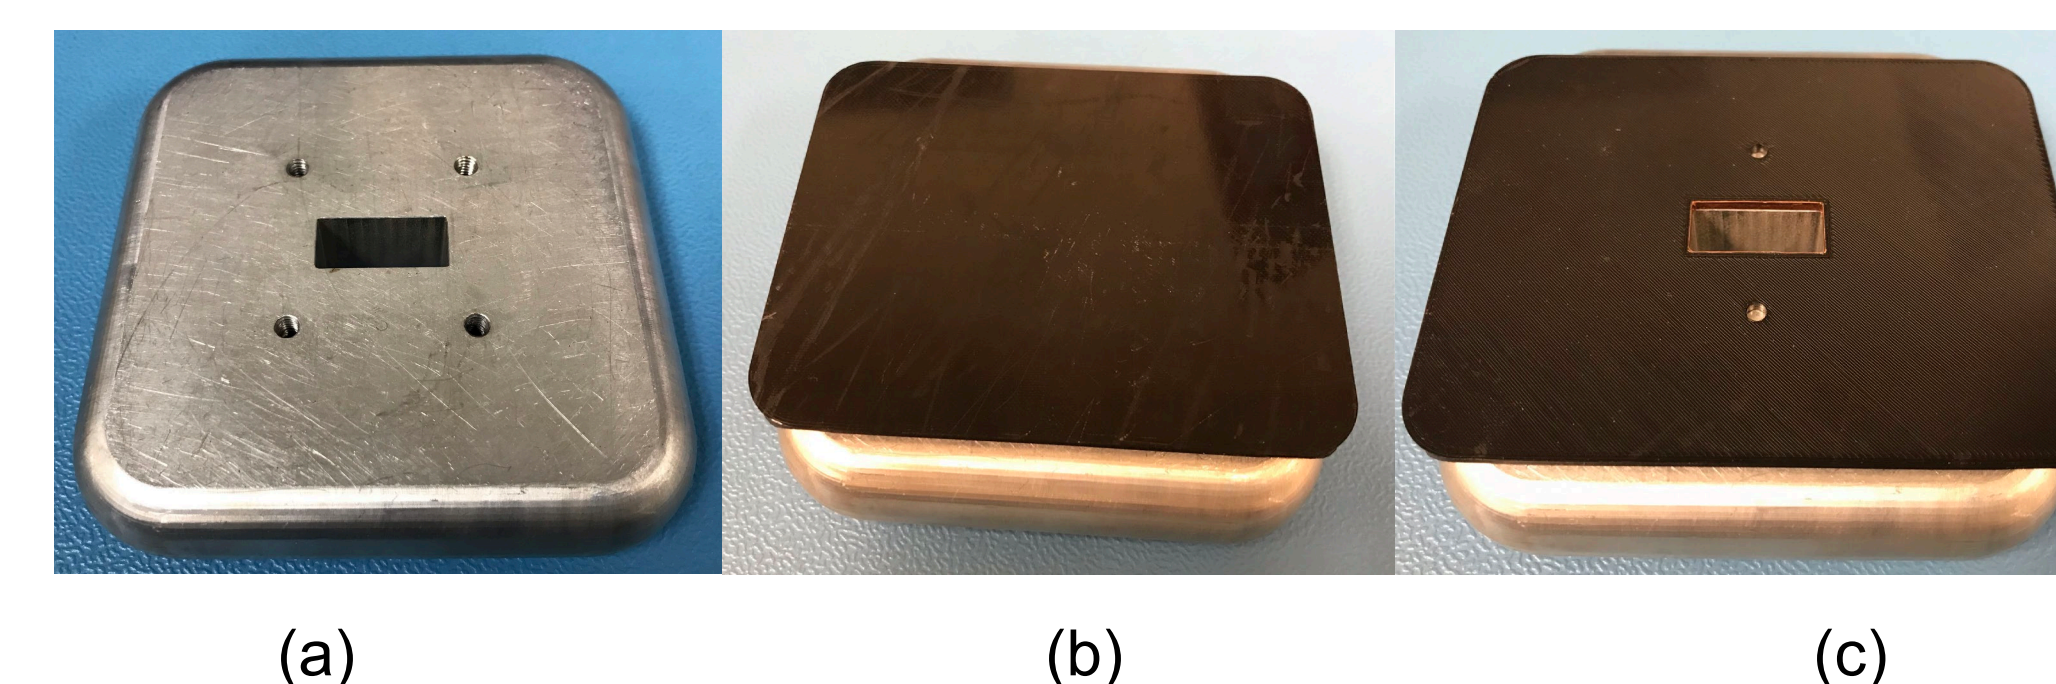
Aluminum engineered flange (a) with lossy applicator (b) and with lossy flange cover (c).
